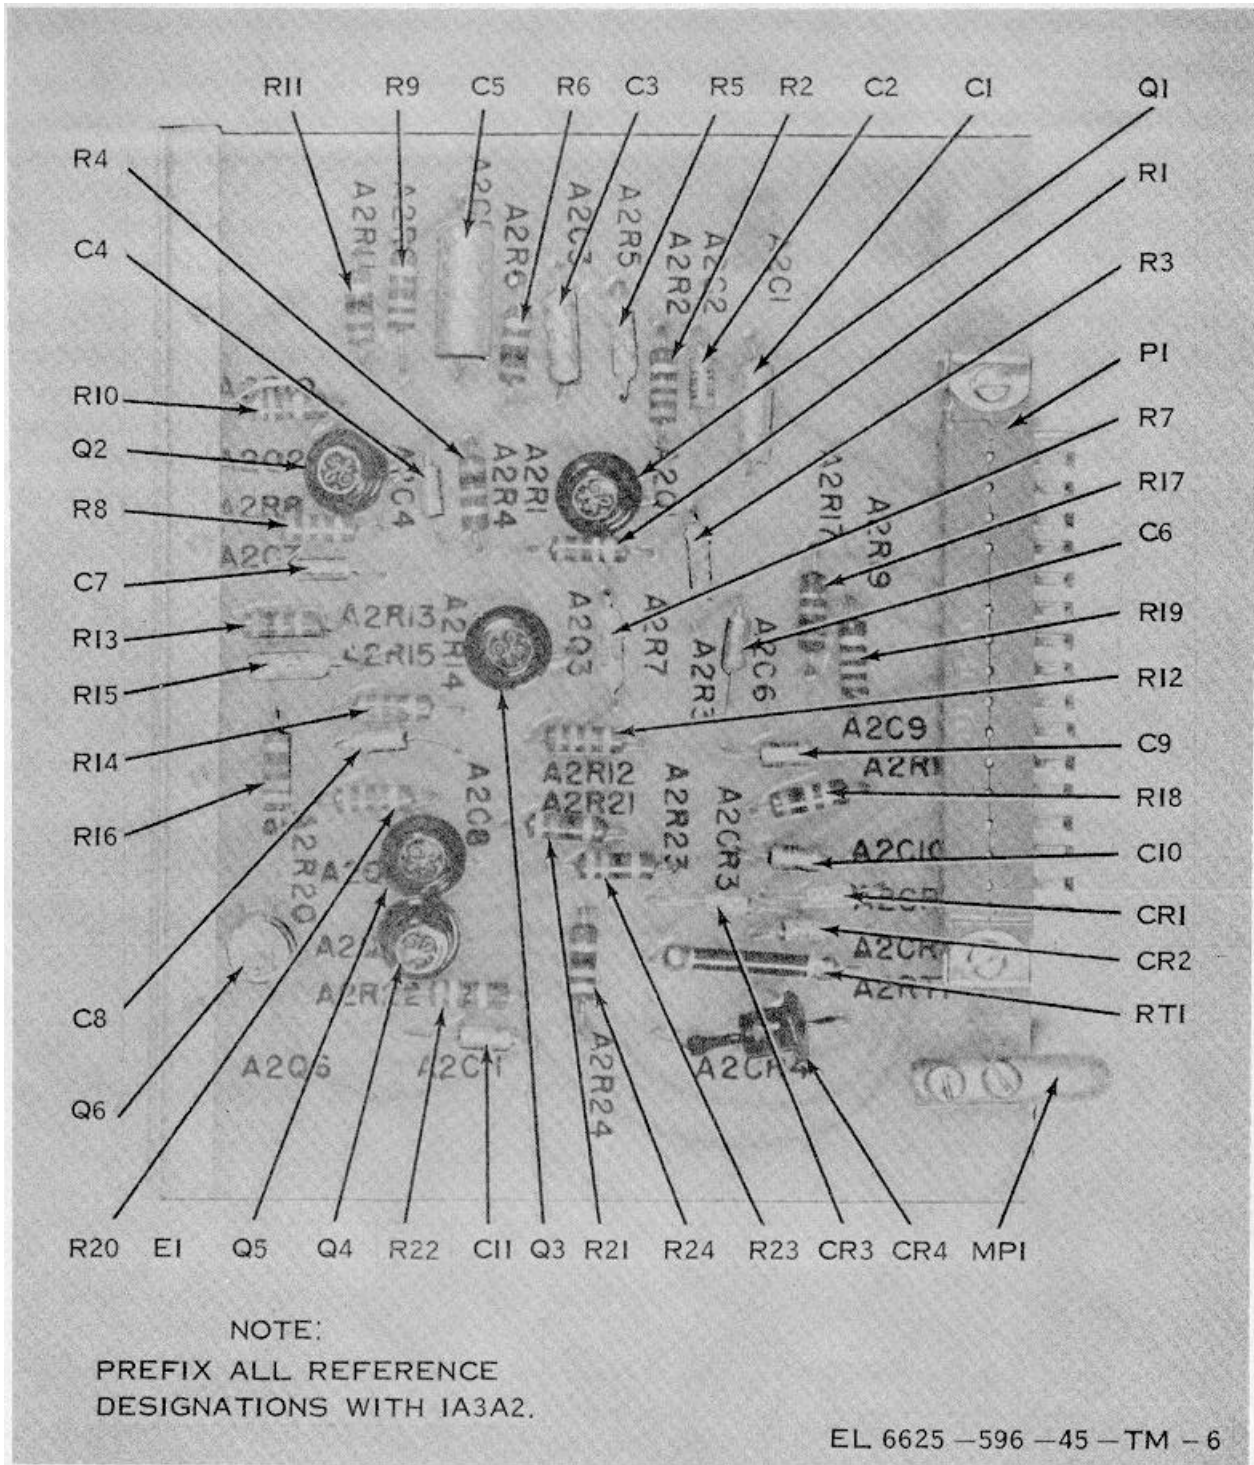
Meter amplifier assembly 1A3A2, parts location.
